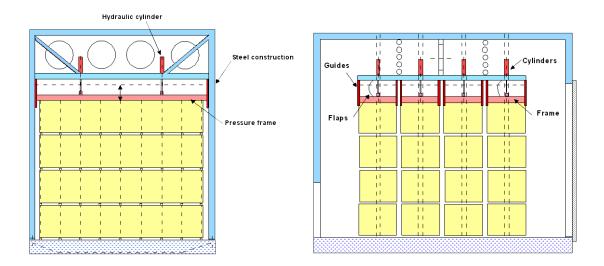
The kilns should be especially designed for variable high top pressure on the packages.
